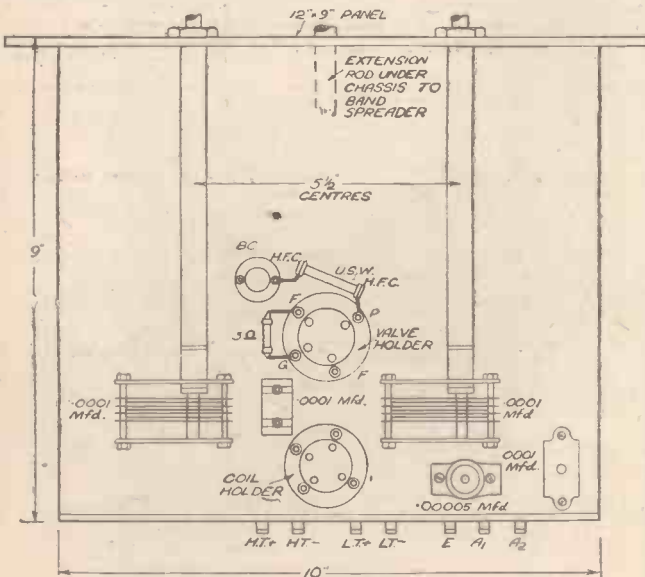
This layout diagram shows the best method of arranging the parts for this unit. The chassis is constructed from plywood, with side runners 2 1/2 in. deep. A plywood panel is employed.
